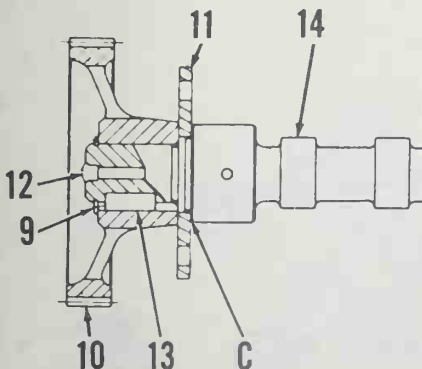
Install gear (10) on camshaft (14) so there is 0.007-0.22 mm clearance (C) between retainer (11) and side of front camshaft journal.
